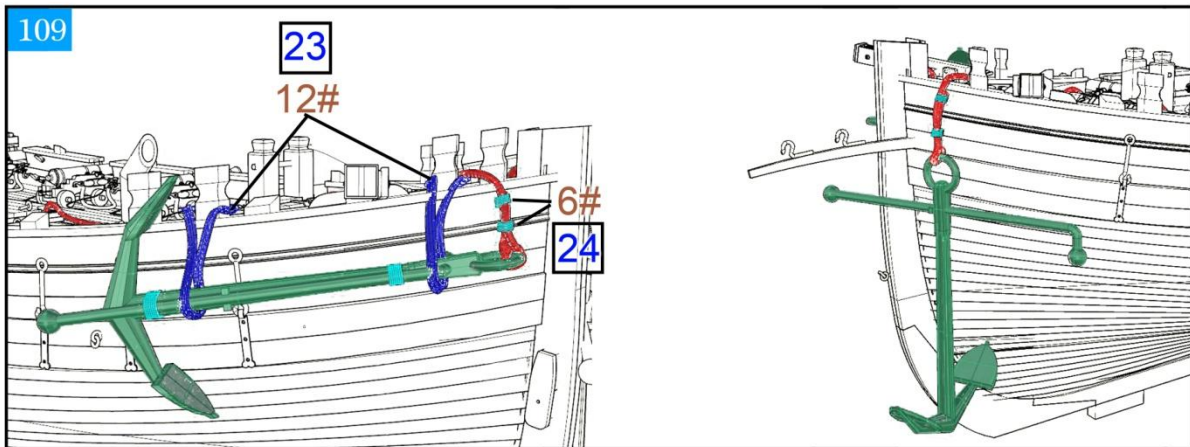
Constructions of the anchors, installation and run of anchor cables.
